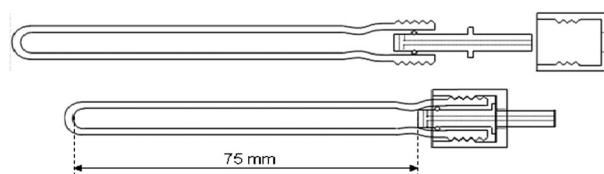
Berthelot tube components, silica glass tube, piston (with embedded O-ring) and valve cap.
